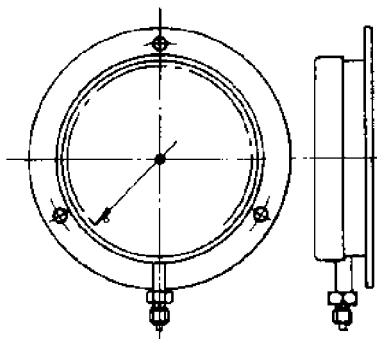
SURFACE MOUNTING GAUGE WITH BOTTOM CONNECTION
